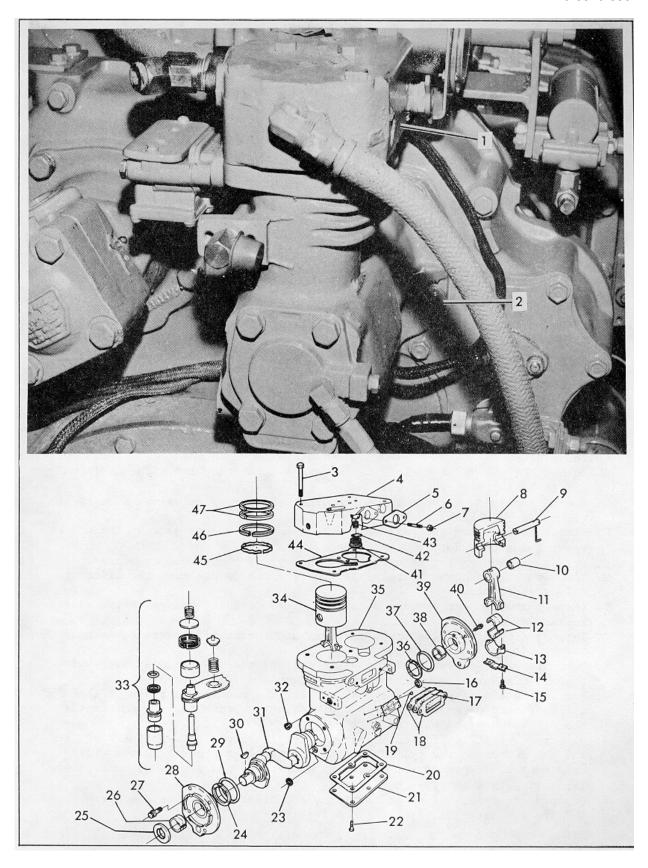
Air Compressor Removal and Disassembly. (Sheet 1 of 2)
